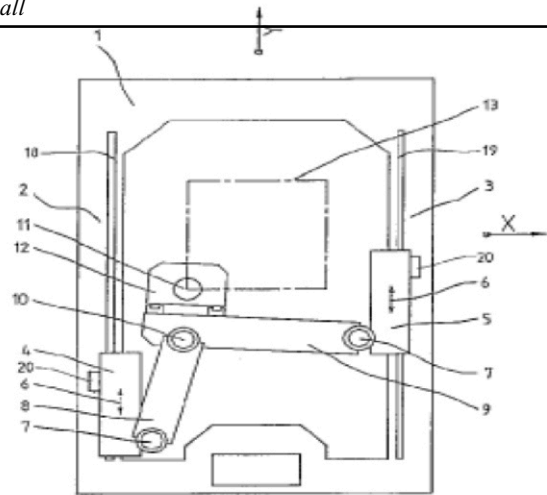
Patent No.: US 6328510 Title: Machine tool for three axial machining of work pieces
